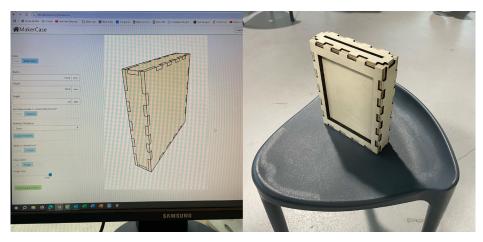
Screenshot of the design created on Maker Case and the assembled frame after adjusting and laser cutting the files
